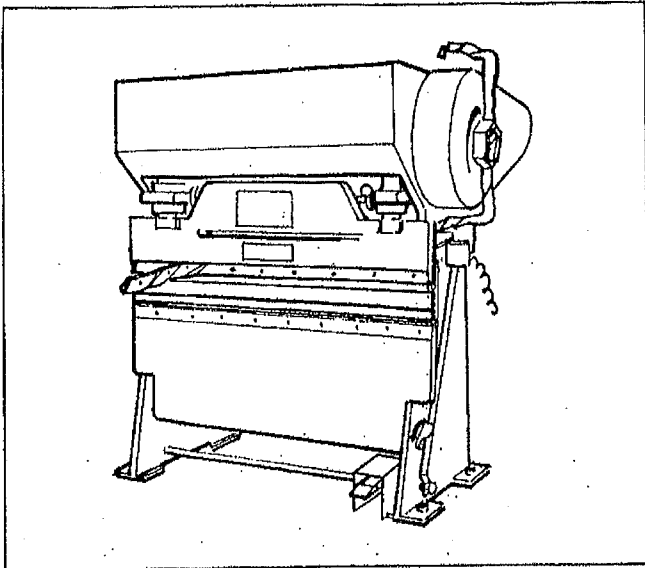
CAREFULLY INSPECT MACHINE FOR DAMAGE
